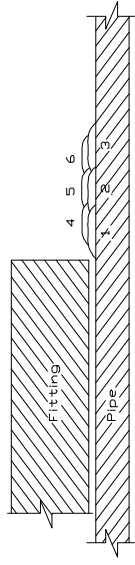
Suggest method of reducing gap between pipe and fitting before welding to fillet throat
